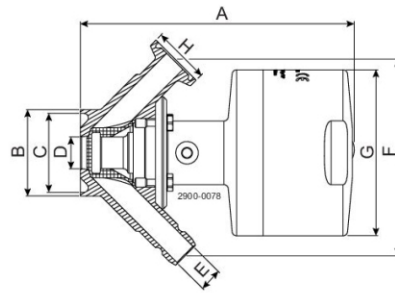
Pneumatic with valve body: Collared pipe welding
